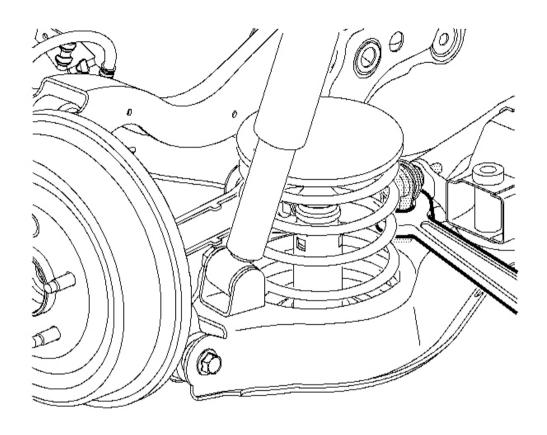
Stabilizer Link & Lower Control Arm Nut Courtesy of GENERAL MOTORS CORP.
